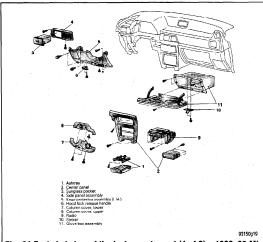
Exploded view of the instrument panel (1 of 2)—1990–92 Mi-
